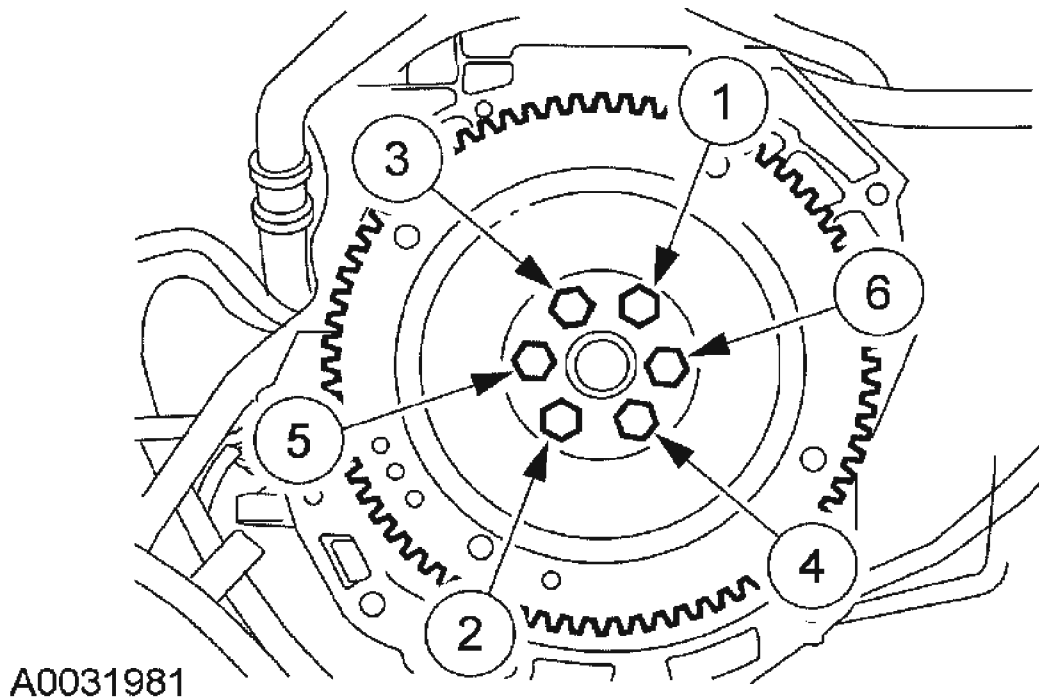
Identifying Tightening Sequence Of Flywheel Bolts
